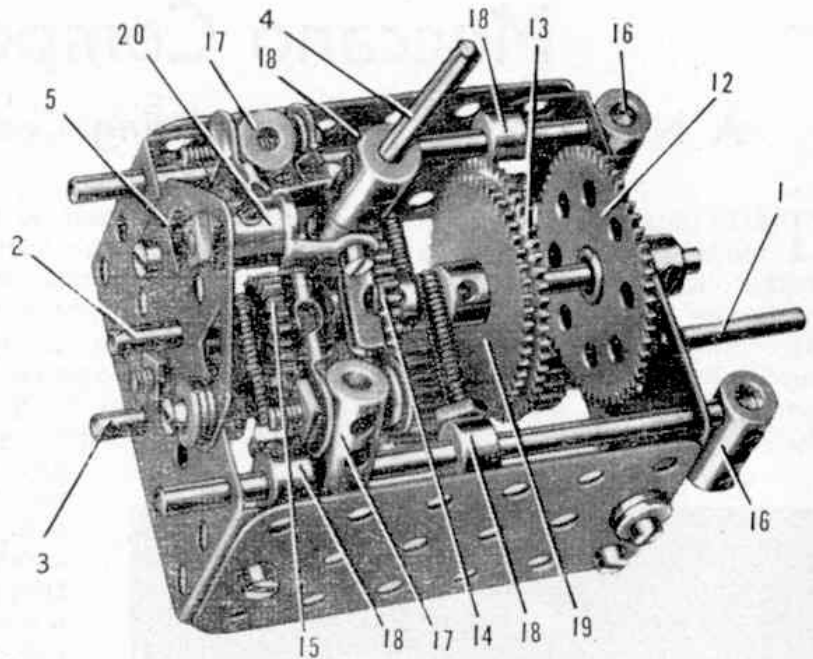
A three-speed and reverse gear-box that makes use of the new Rod with Keyway, Part No. 230.
